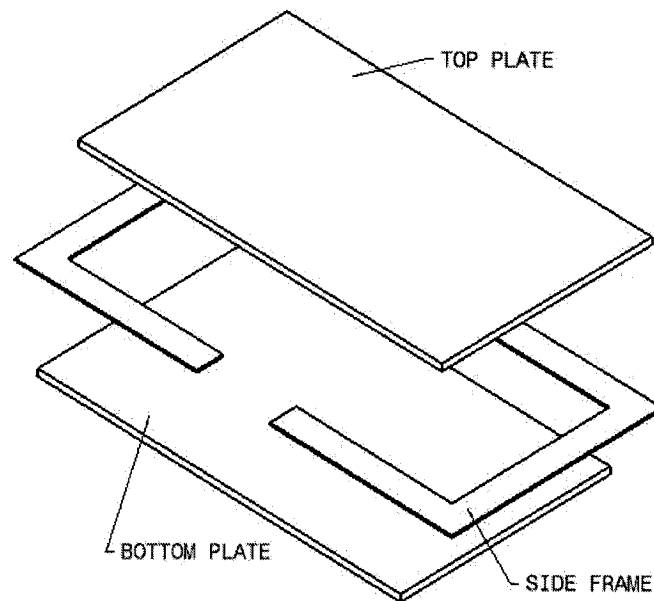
Steel Frame mold used for laminate manufacturing.
